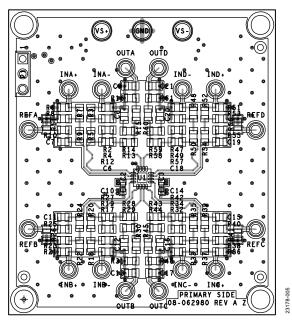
EVAL-LTC2065/LTC2068-TQFN Layout Pattern, Primary Side
